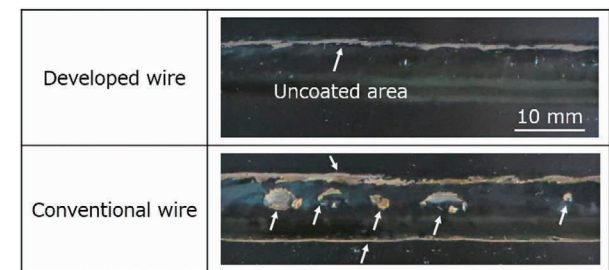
Comparison of weld bead appearances after electrodeposition coating
